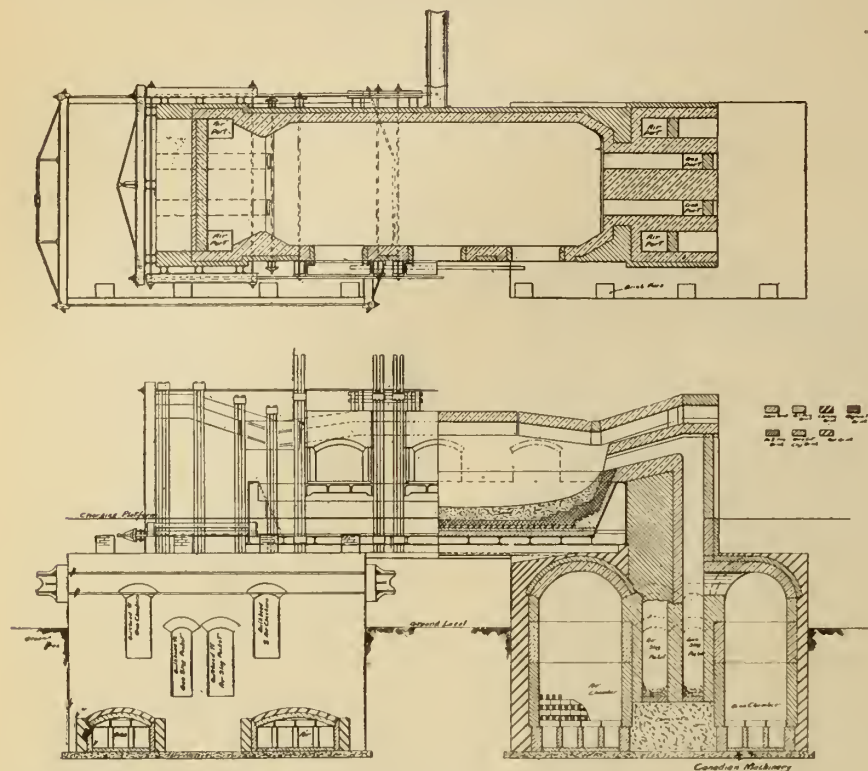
Sectional, Elevational and Plan Sectional Views of 25-Ton Furnace.
